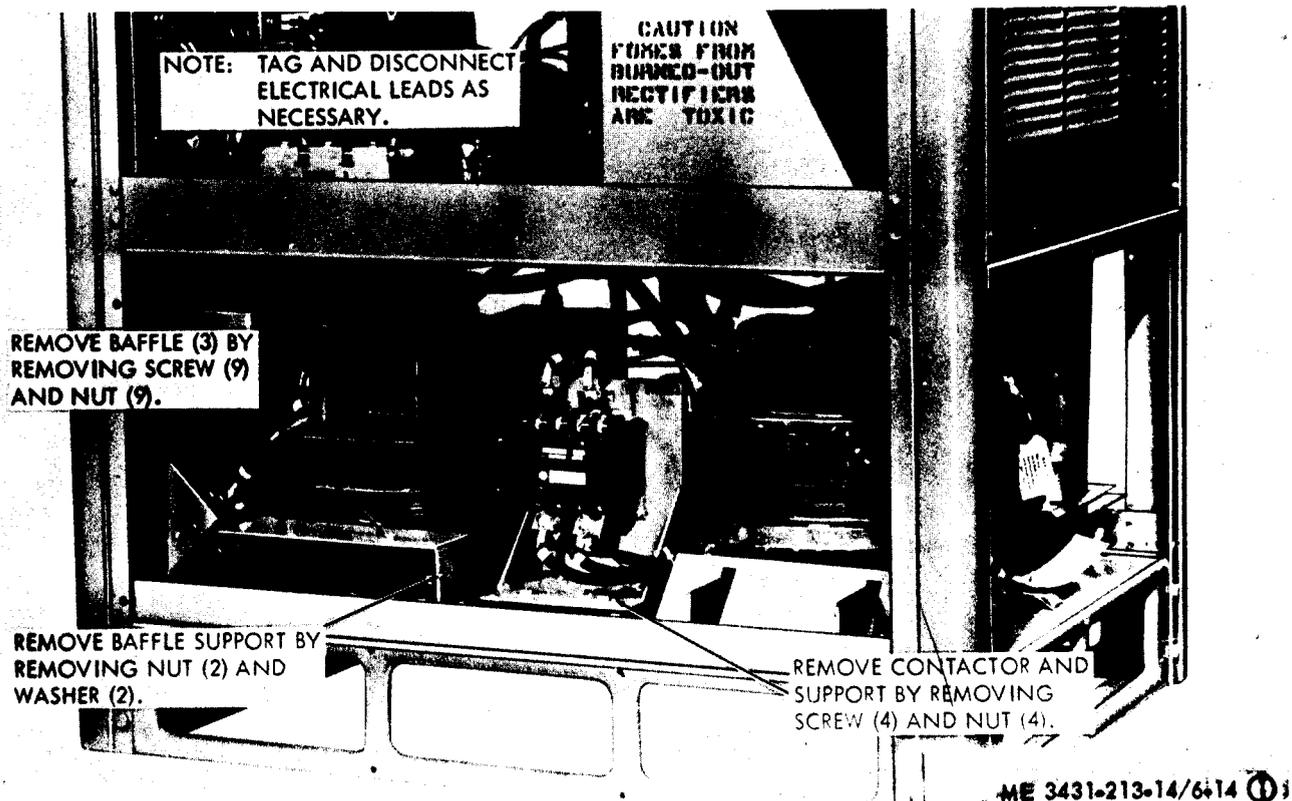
①. Stabilizing reactor assembly, removal and installation.
